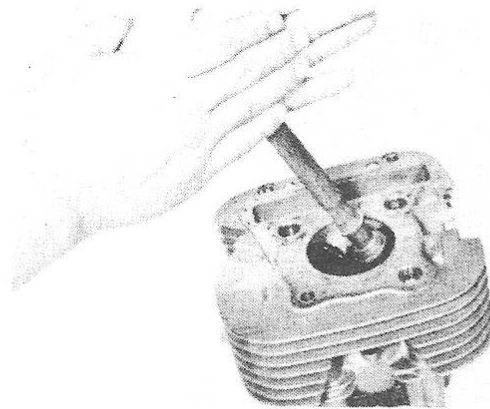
B.14 Rotate the valve lapping tool back-and-forth between the palms of your hands (Sec 9)
